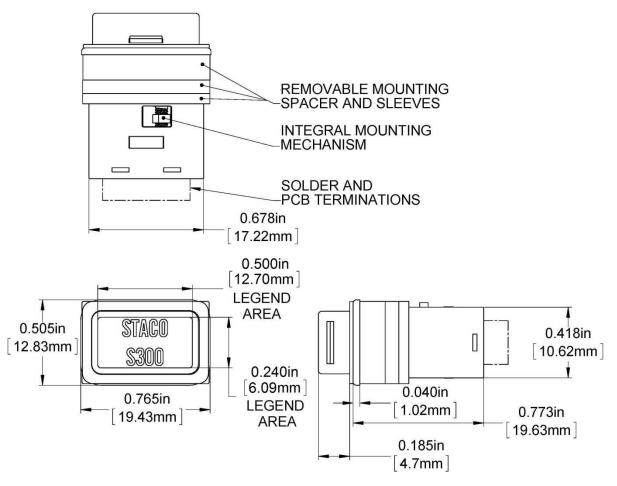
Drip-proof switches - Typical type I solder and PCB termination
